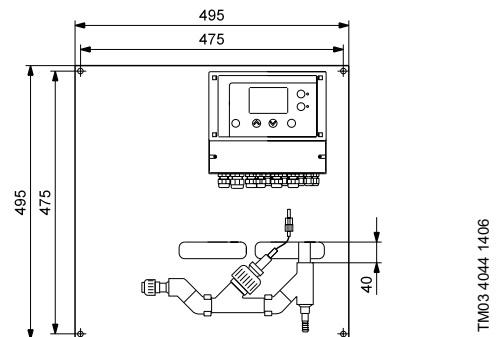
Dimensions, Conex® DIA-1-A, F, preassembled systems for fluoride
